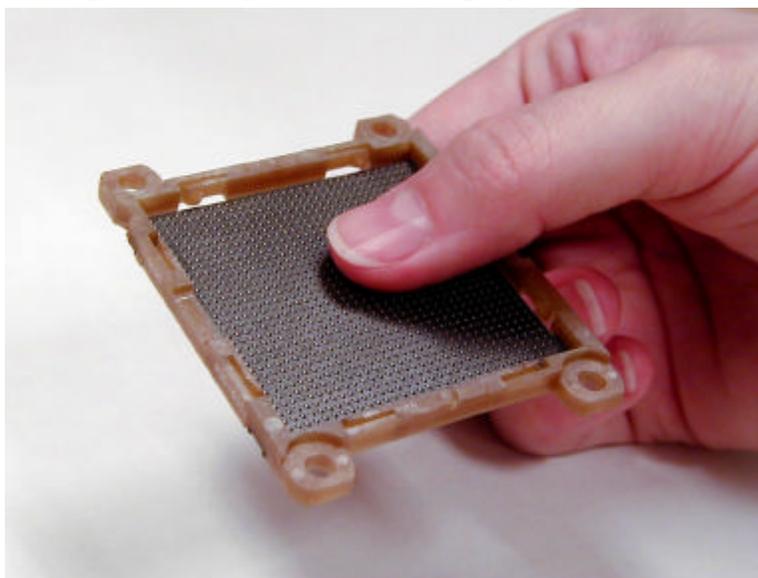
Bad handling. Fingers touching c-spring contacts.
